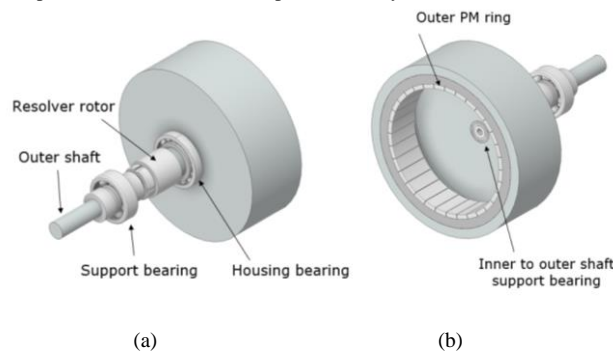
Outer shaft assembly: (a) rear view, (b) front view.
